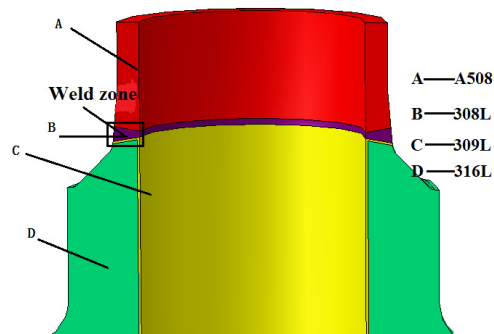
Schematic illustrations of a typical safe end for dissimilar metal weld joint.
